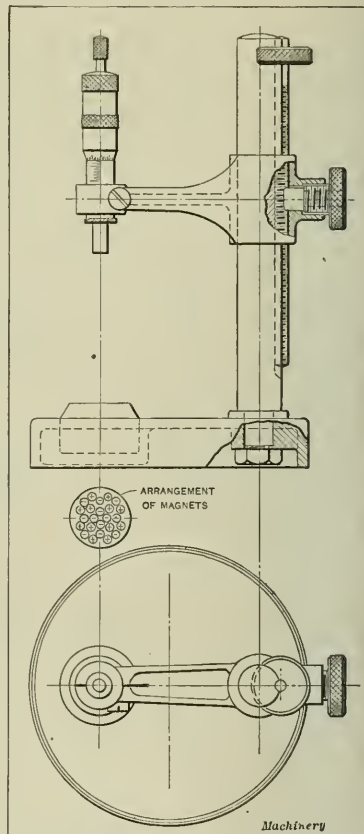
Magnetized Stand for Use in measuring Threads by Three-wire Method
